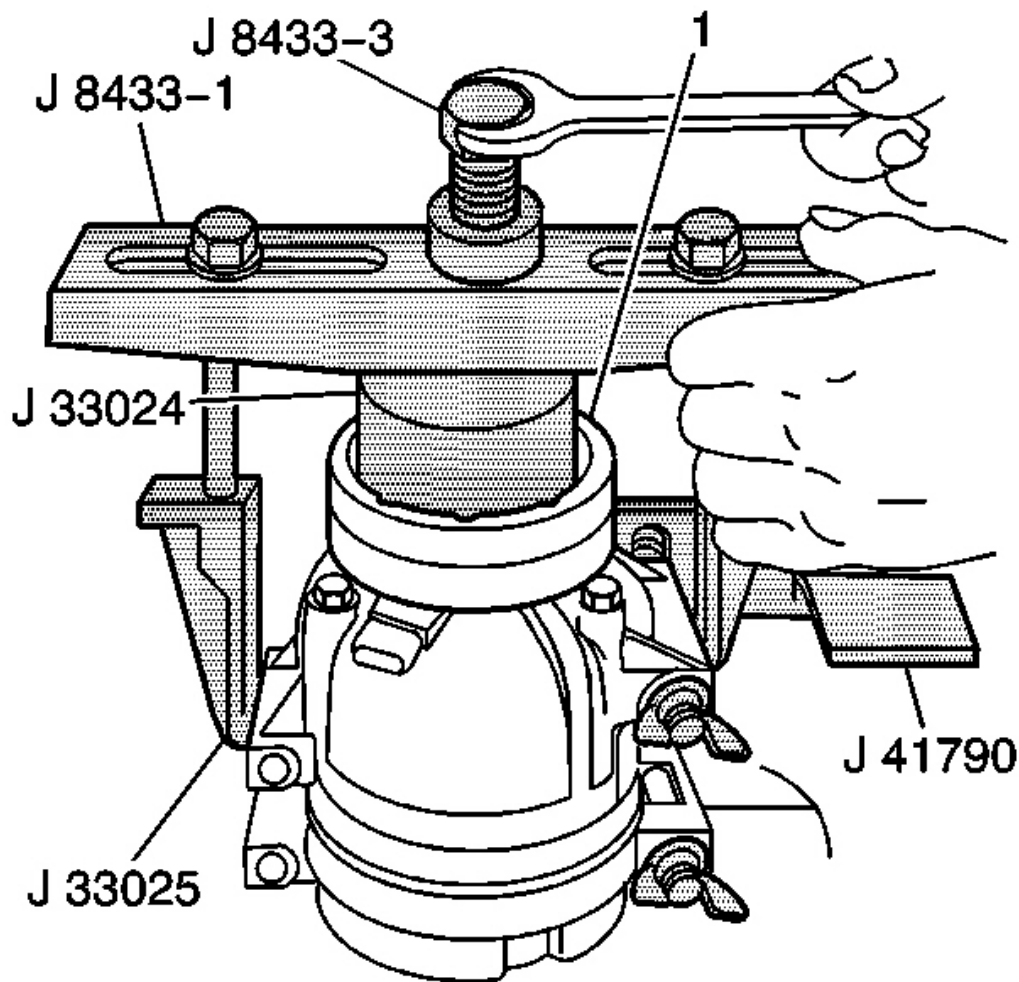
J 8433-1, J 8433-3, J 33024, J 33025, J 41790-A & A/C Compressor Front Head Clutch Coil Assembly
